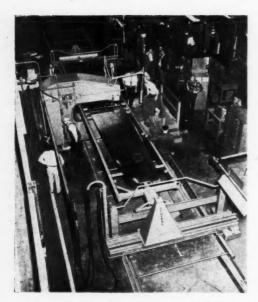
Drivmatic automatic riveting machine for DC-8 Jetliner wing panels
